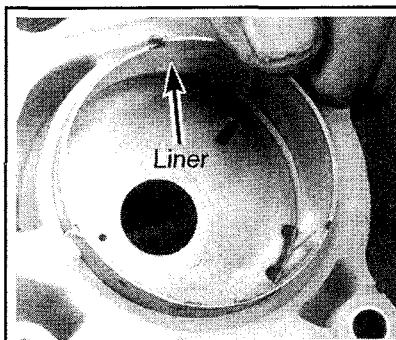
To prepare for installation, install the impeller plate using a new gasket...
